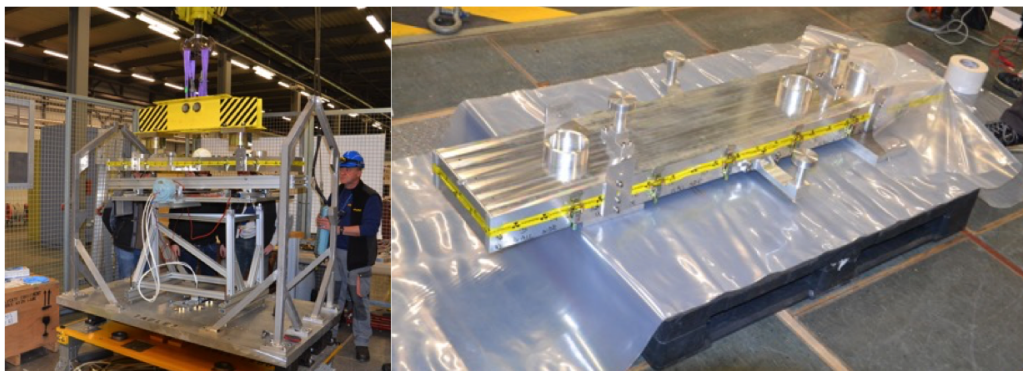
Separation of the target assembly in the surface lab (left), target box on a pallet before wrapping in double plastic foil (right).
